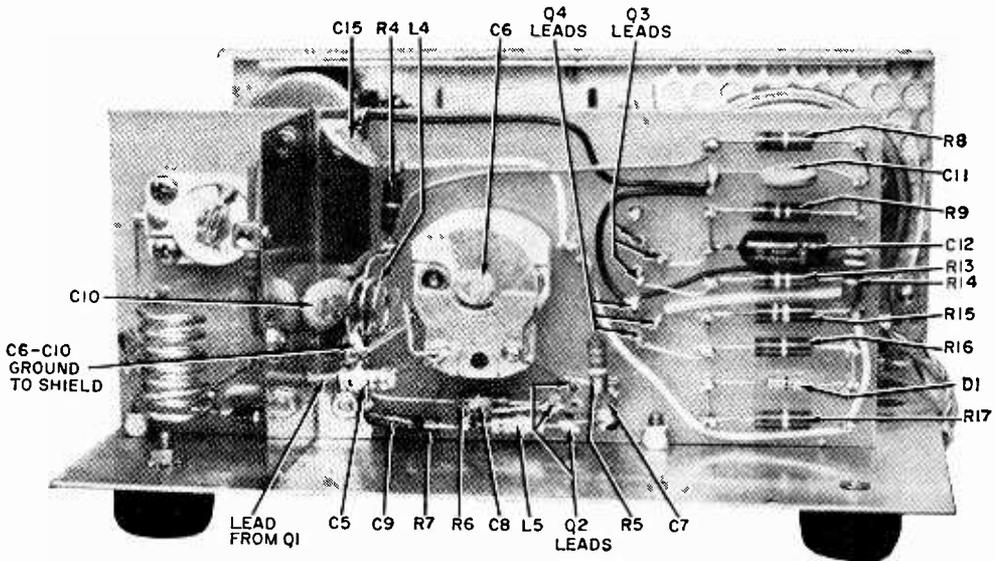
Signal from Q1 stage left of shield is coupled to detector by wire through hole in shield. R.f. and squelch circuit transistors mount in sockets on front face of circuit board.
